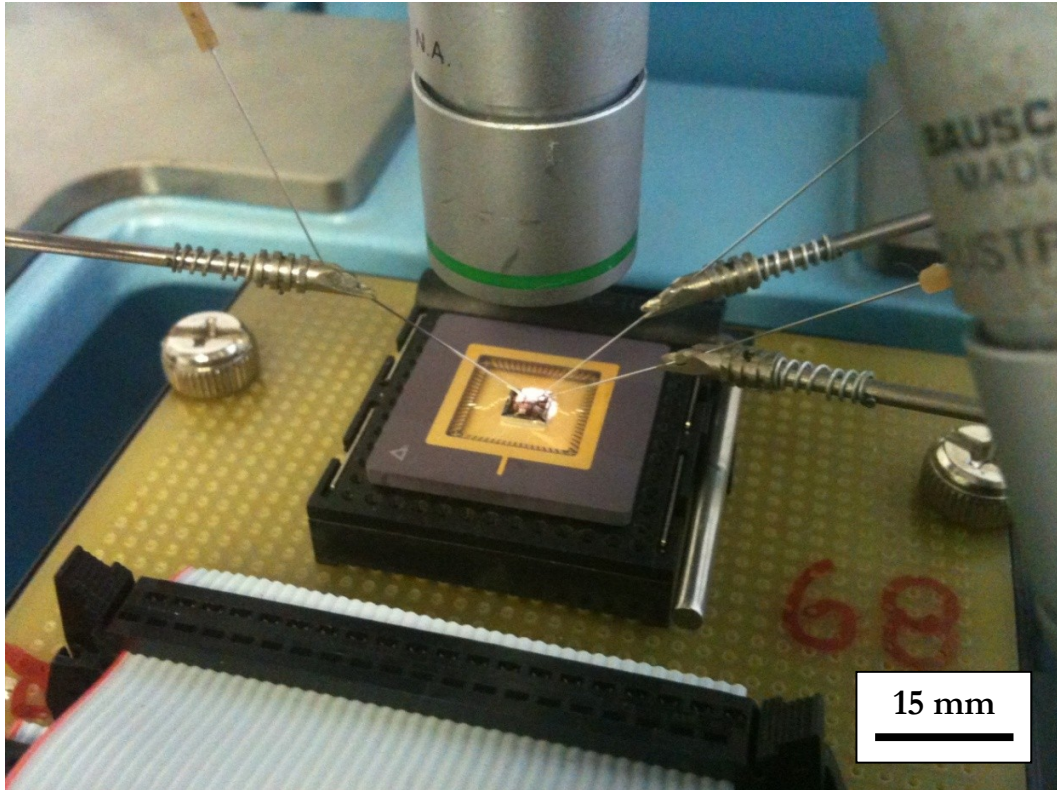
Probe Needles Used for Micro-Crawler Assembly
